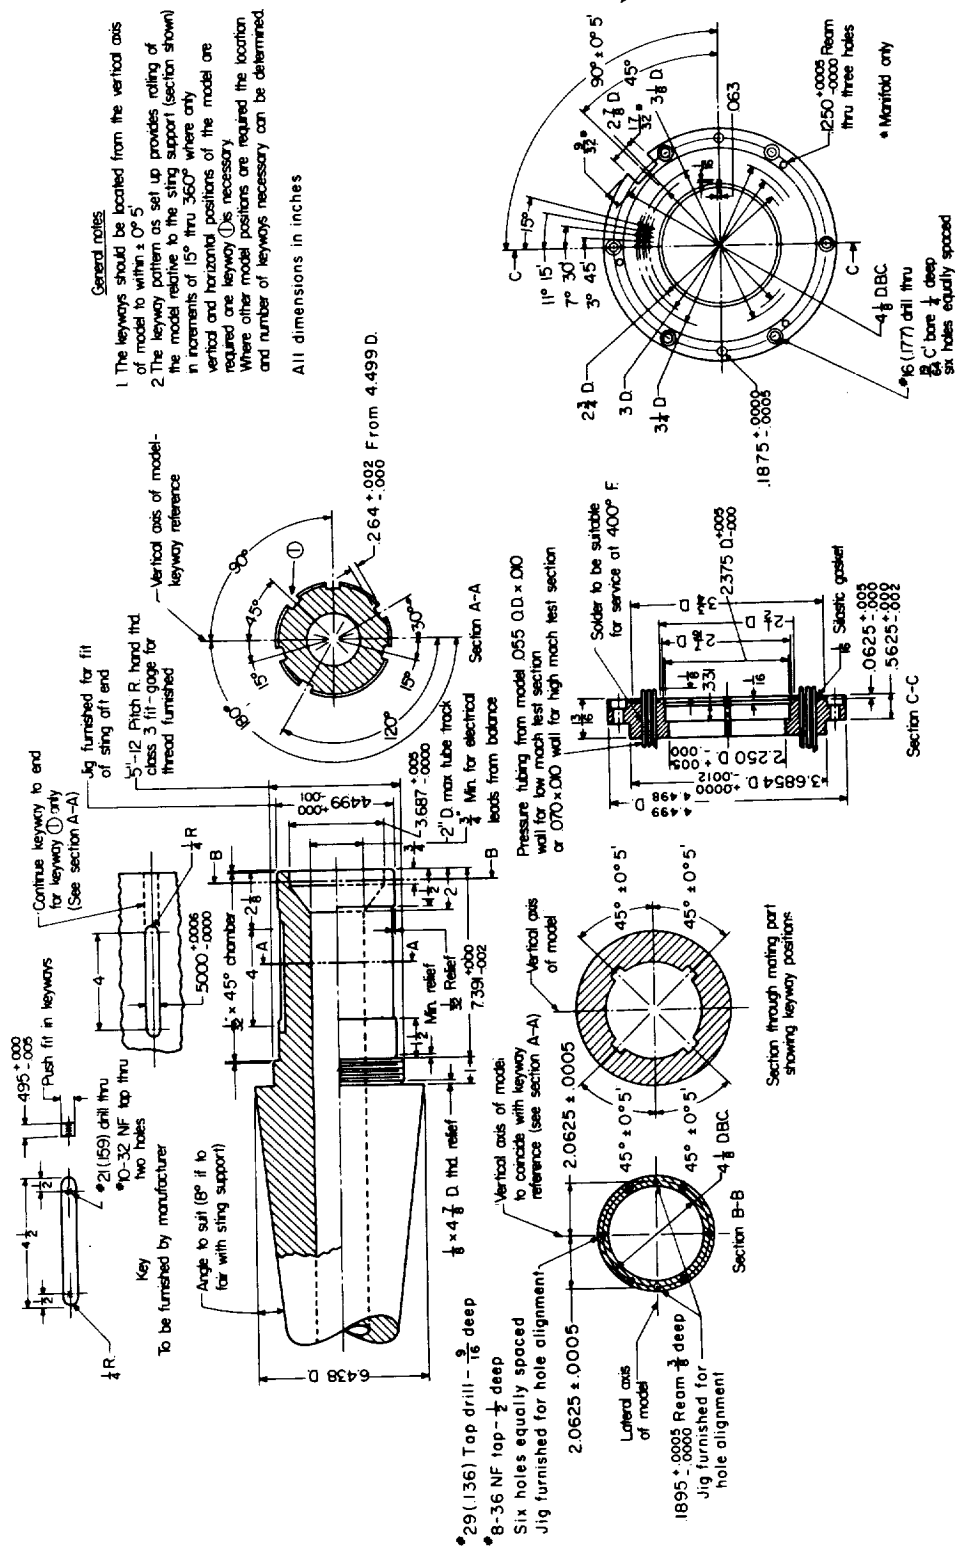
Model sting (portion) to mate with basic sting support, Langley Unitary Plan Wind Tunnel.
